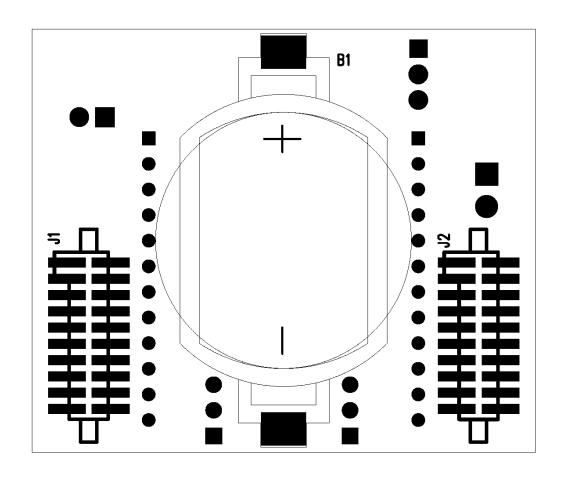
TiWi-uB1 EM Board Bottom (Note: Viewed from Top looking through PCB)
